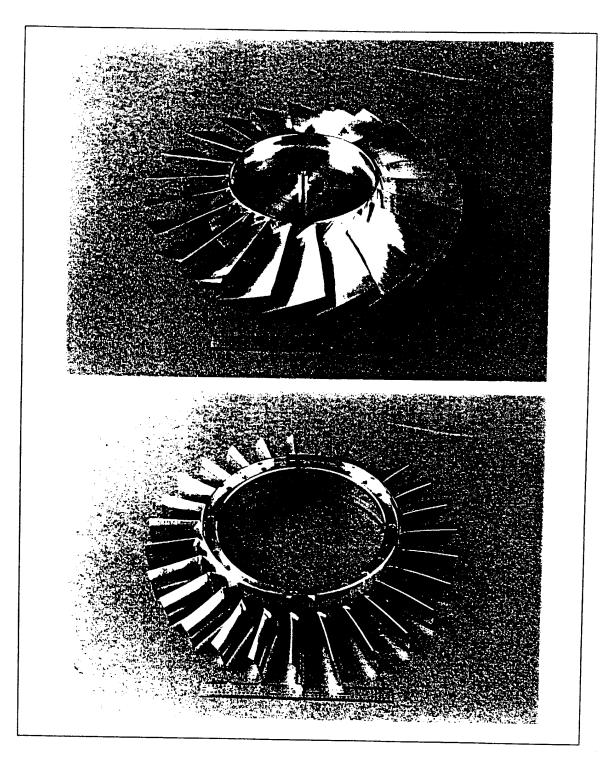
Manufactured Blading; Rotor (Top), Stator (Bottom).
